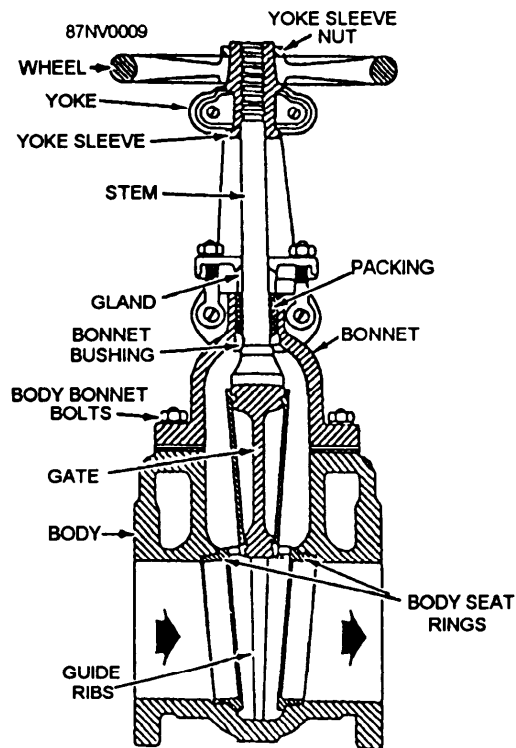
Cross-sectional view of a gate stop valve rising stem.
